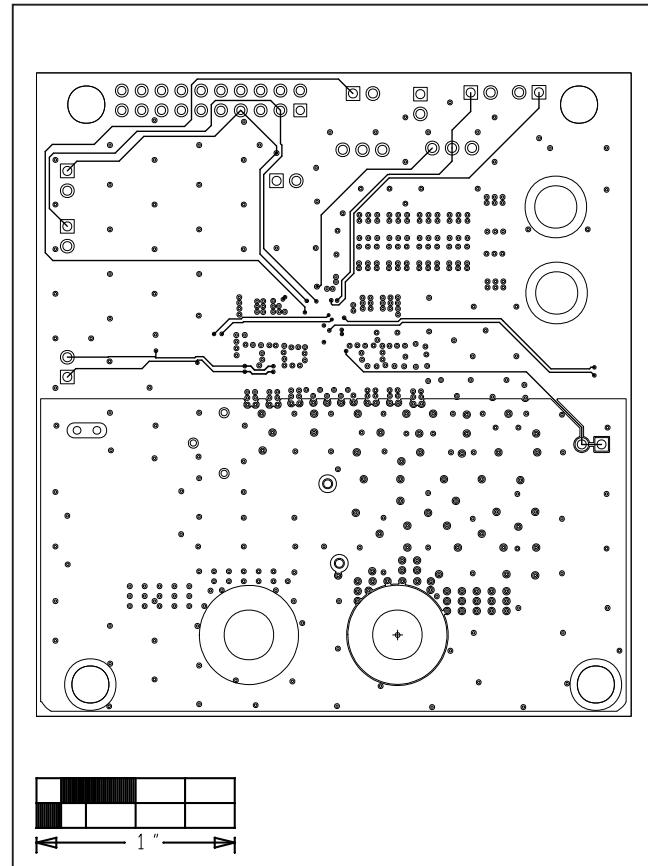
MAX20499C EV Kit PCB Layout—Inner Layer 4
